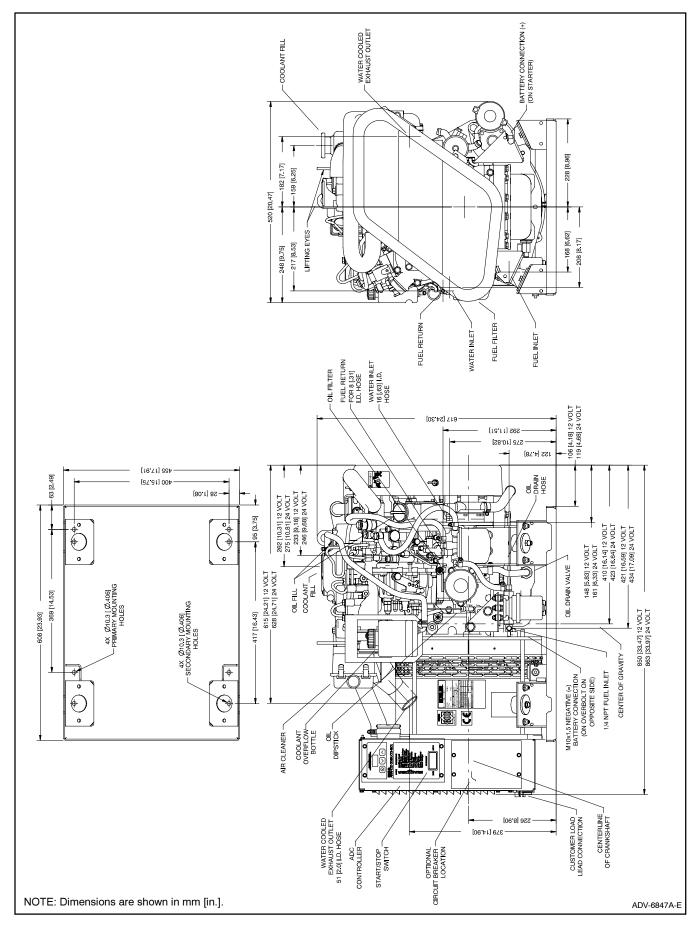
Dimension Drawing, 10EOZD and 8.5/9EFOZD
